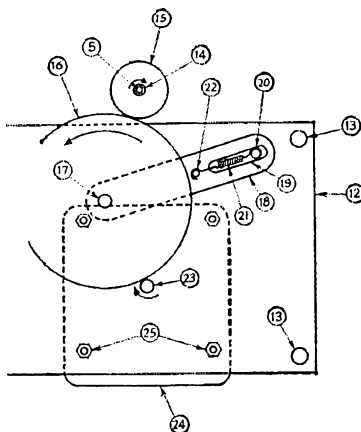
Parts mounted on subpanel (12). Motor shaft (23) drives idler wheel (16) which, in turn, drives capstan drive wheel (15) mounted on capstan shaft (14). Turned-down end (5) of capstan shaft bears against spring-loaded pressure idler (6) in Fig. 2 to drive the tape.
